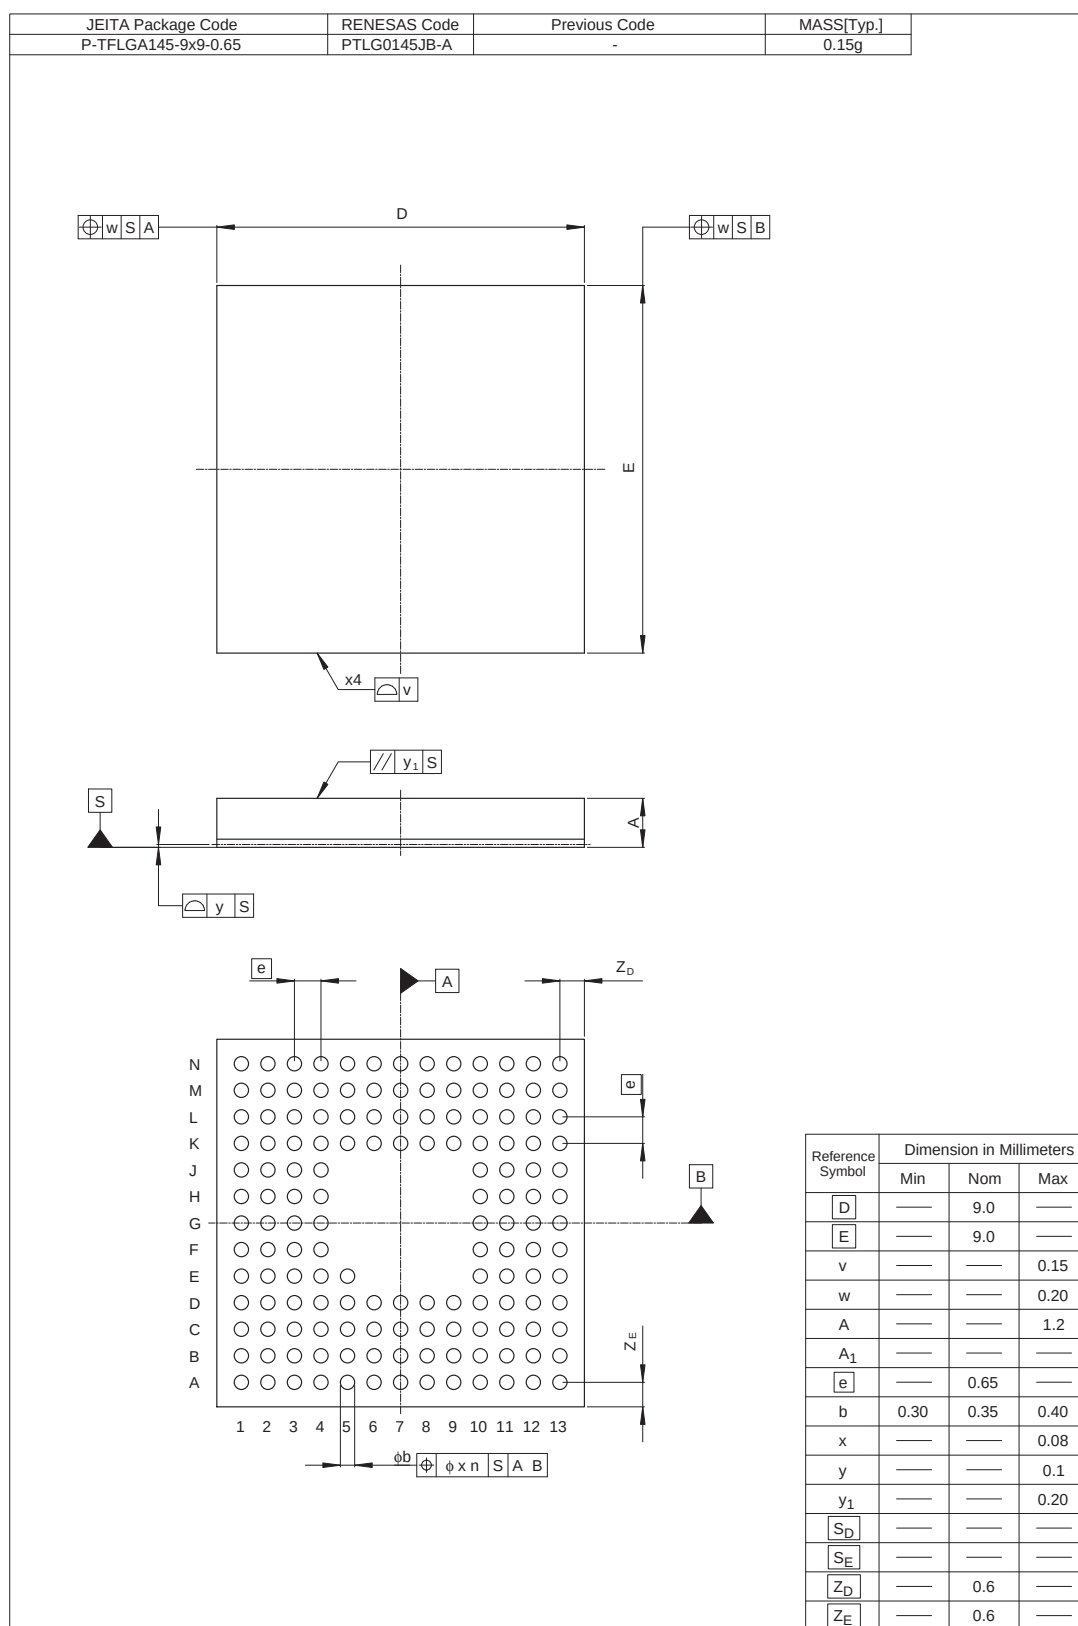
Pin TFLGA (PTLG0145JB-A) Package Dimensions
